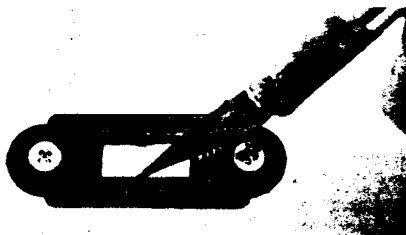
Tape the switch plate to the side of the fuselage, drill two $\frac{1}{16}$ " screw holes, install the screws, then mark the switch cutout with your modeling knife.
